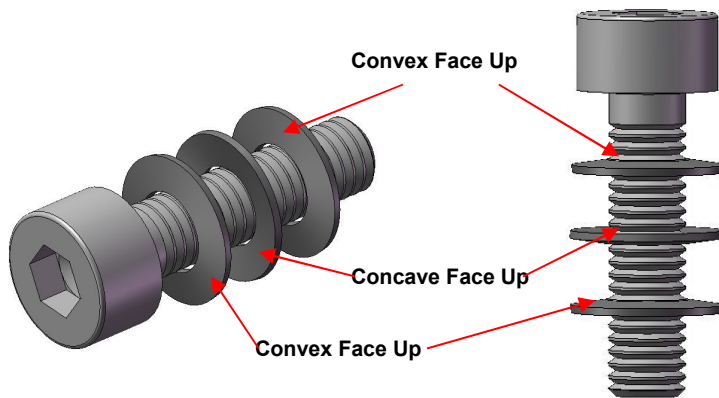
Arrangement of the 3 Belville Spring Washers for Each M3 x 12mm Fixing Bolt Assembly.
